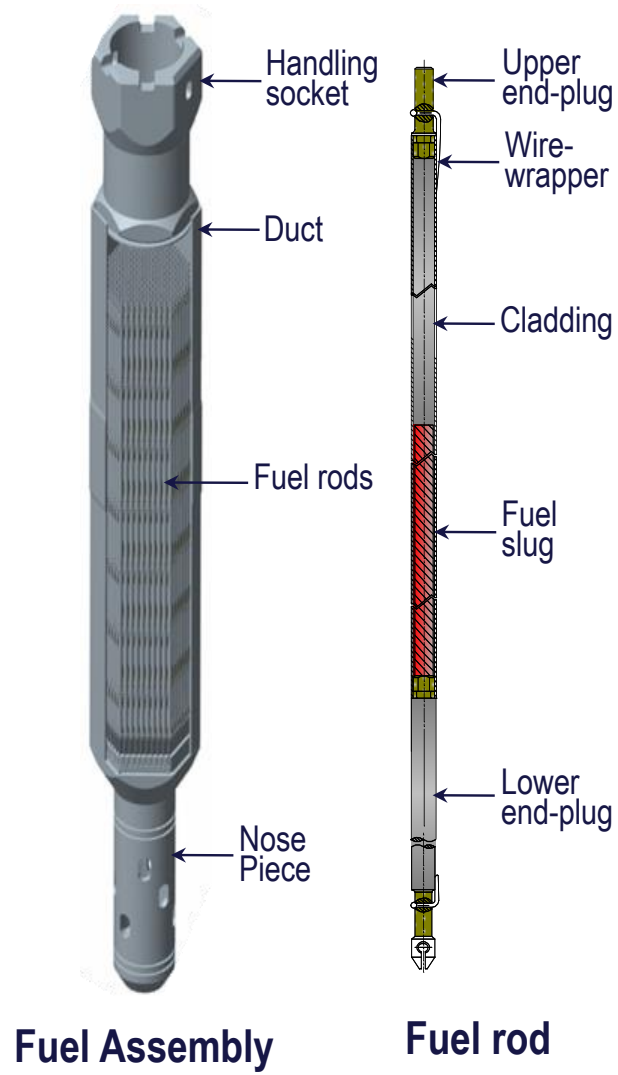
Schematic illustration of the fuel assembly and fuel rod [2].
